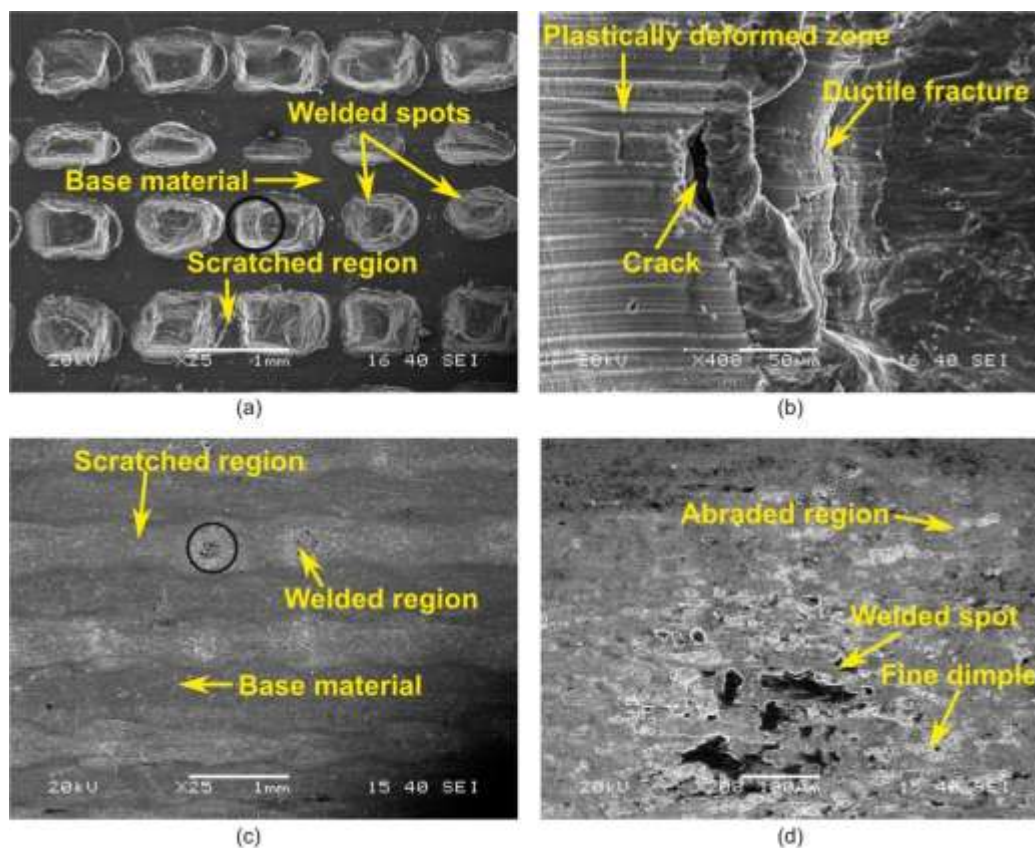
Fractured surfaces of ultrasonically welded specimens in normal surface condition (a) Al side surface with 25X zoom; (b) Magnified image of a; (c) Cu side surface with 25X zoom; (d) Magnified image of c
